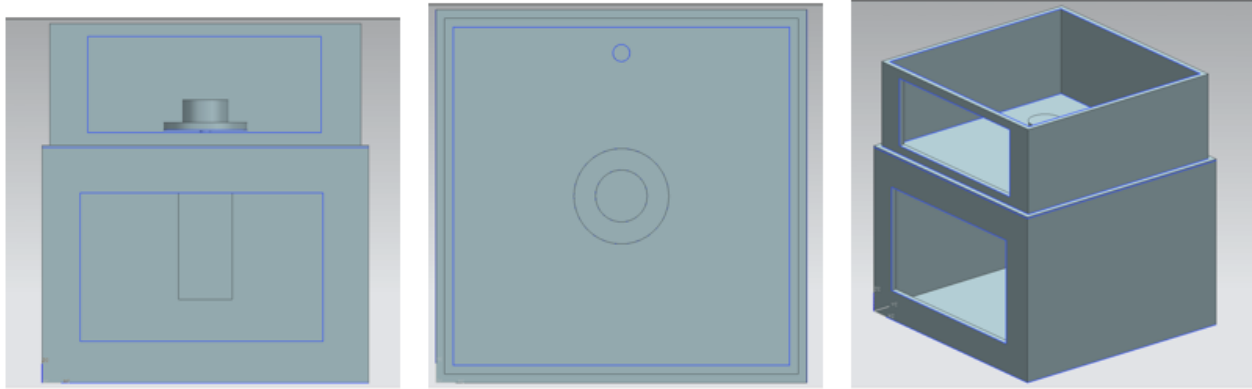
Automated Actuator Inspection Device Housing Models
